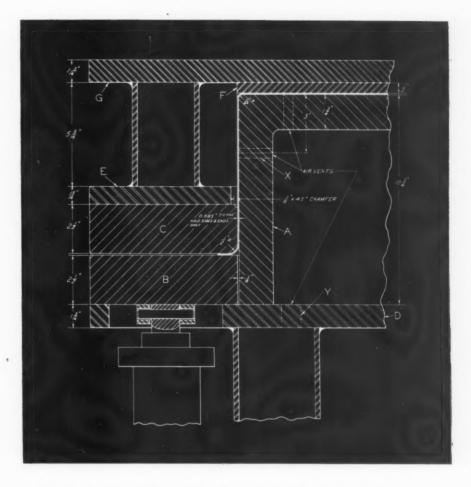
Cross-sectional Drawing of the Die Set Employed to Produce the Large Magnesium-alloy Container Held by the Girl in Fig. 2
